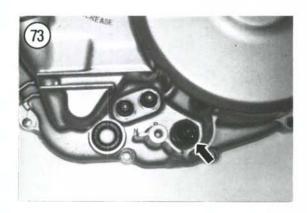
is shown with the right-hand crankcase cover removed for clarity. It is not necessary to remove the cover for this procedure.
